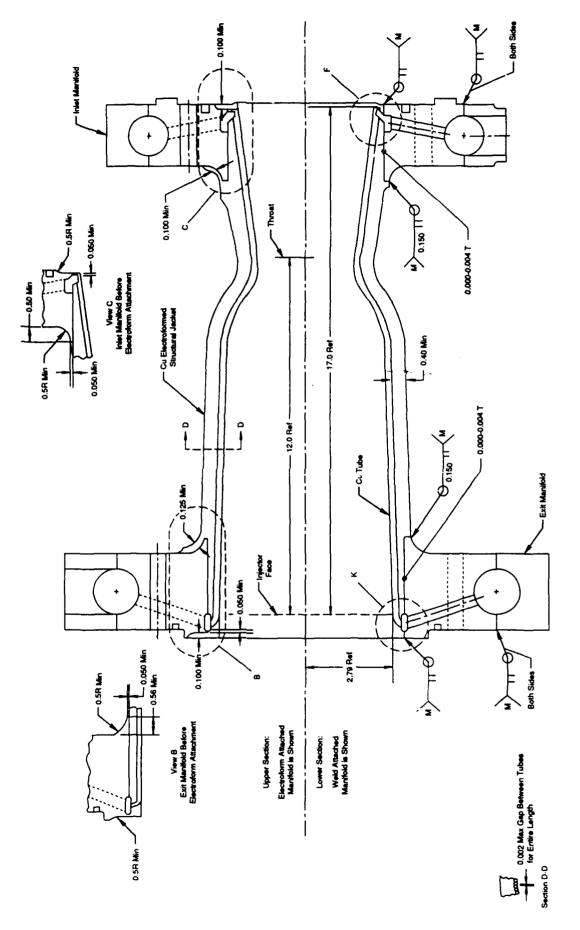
Copper Tubular Combustion Chamber — Advanced Expander Test Bed Alternate Design
